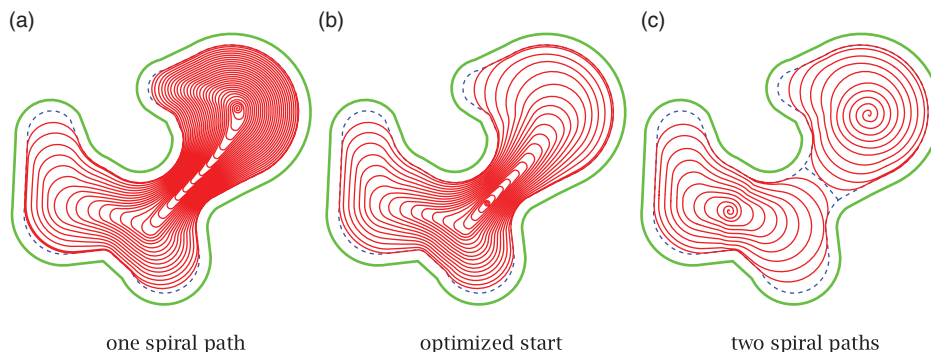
Three possible tool paths for machining a non-convex pocket. (a) Machining with one spiral path [8]. (b) Machining with one spiral path which has an optimized start point. (c) Adequate splitting and machining with two spiral paths. In each sub-figure the dashed curve represents the outermost offset curve ∂S which is traversed by the tool at the end of the machining.
